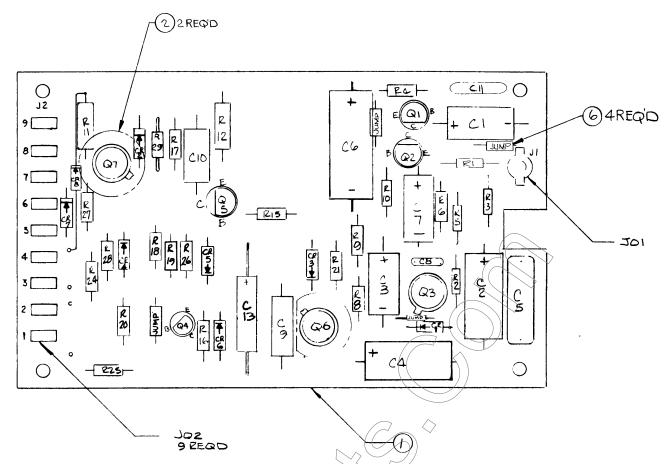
Electronic Part Locations (2C880-5), Power Driver PCB Assembly
